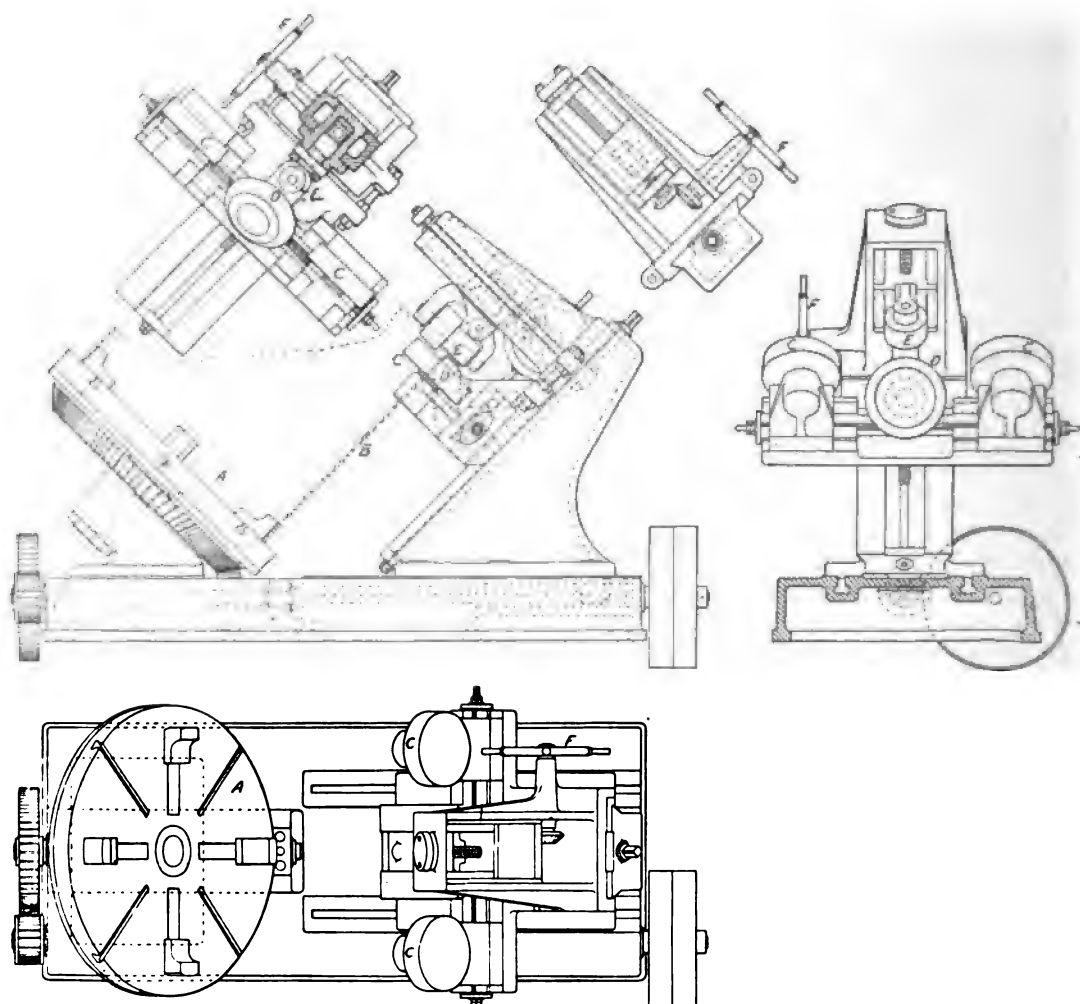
Boiler Flue Flanging Machine. (Henry Berry & Co., Ltd.)
